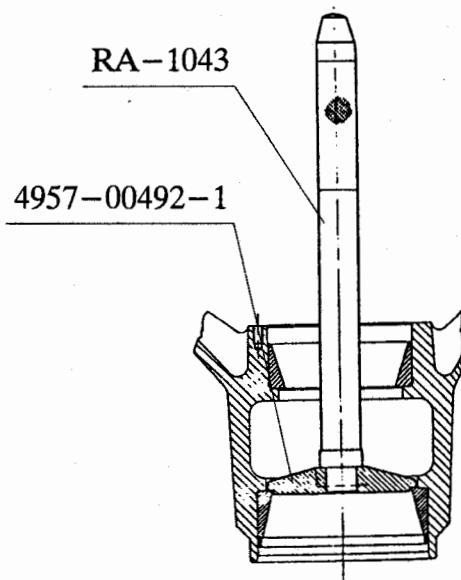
Driving out the sealing ring and the inner race of the inner taper roller bearing
